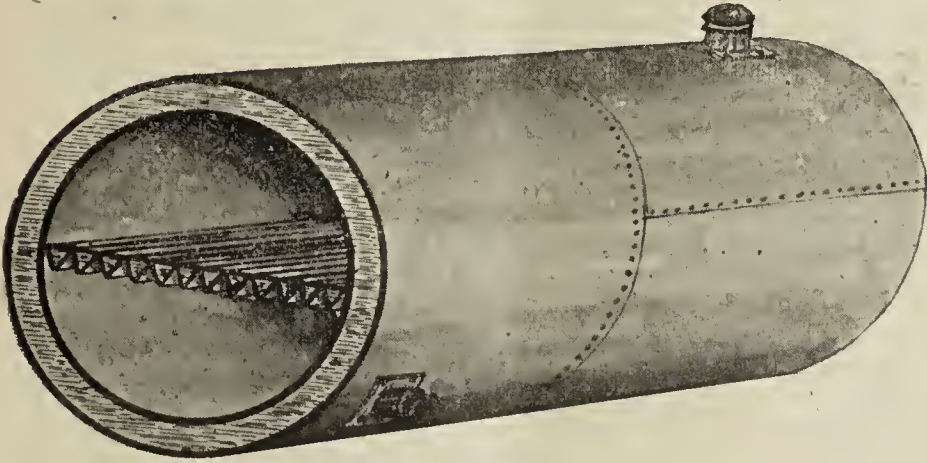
CIRCULAR RIVETED STEEL BOILER.
